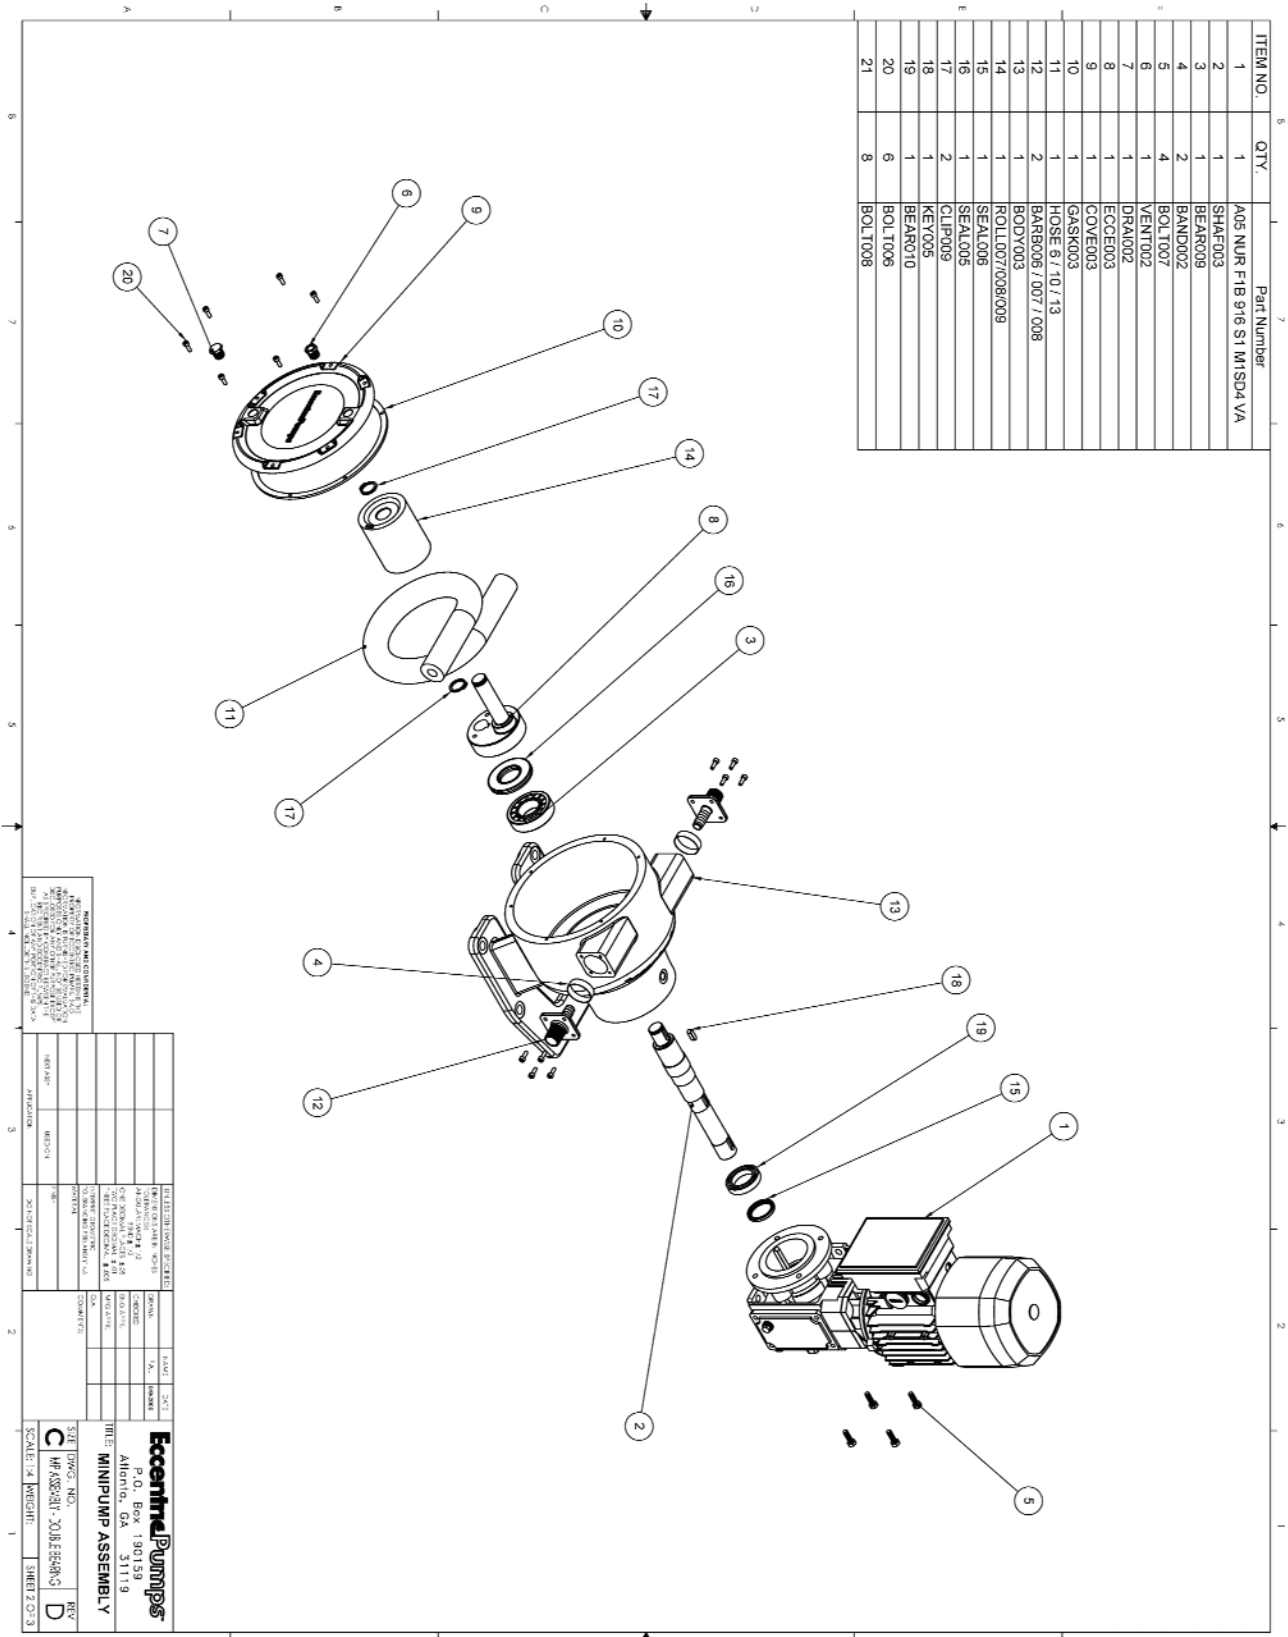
Exploded View of Major Pump Parts. Some Small Parts Are Not Shown.
